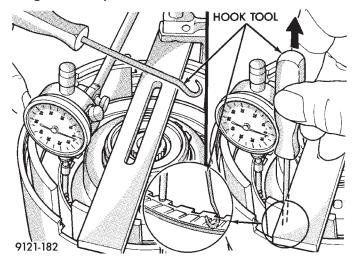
Use Hook Tool to Raise One Clutch Disc
